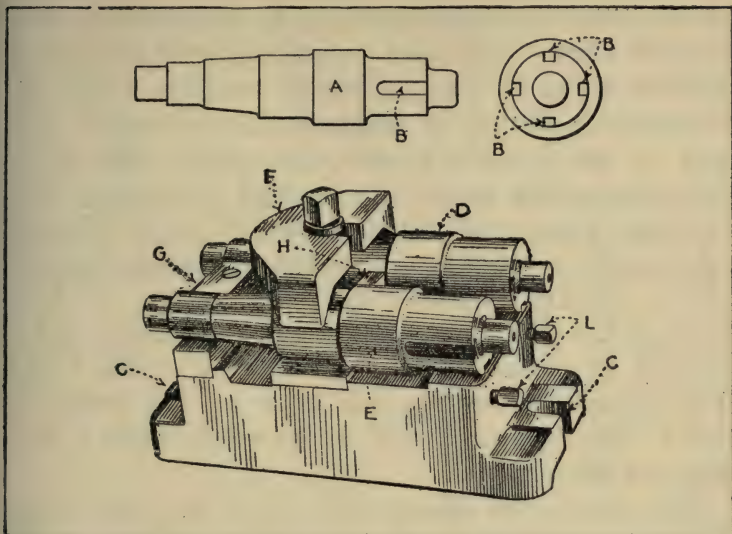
DOUBLE SPLINE-MILLING FIXTURE
